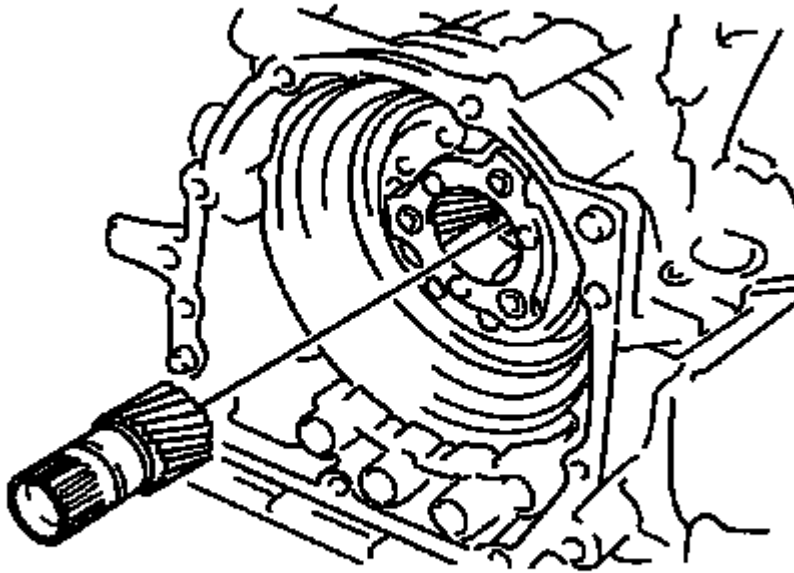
Front Planetary Sun Gear & Thrust Bearing Race
